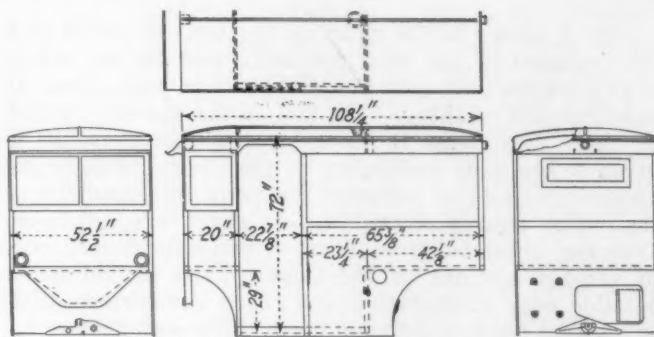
ELEVATIONS AND HALF FLOOR-PLAN OF BODY
